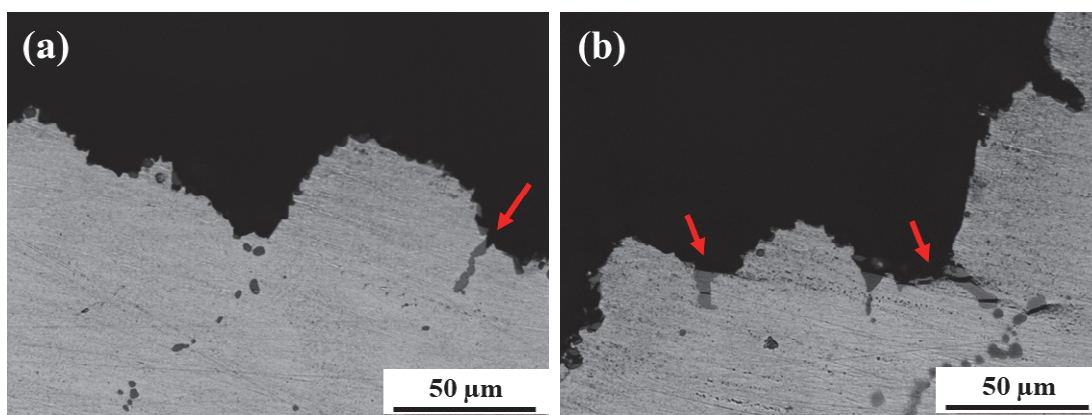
Cross section of fractured tensile specimen in aged condition (1h at 165°C).
